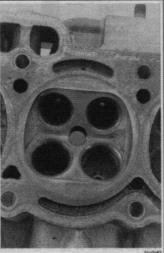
Example of a multi-valve cylinder head. Note how it has 2 intake and 2 exhaust valve ports
